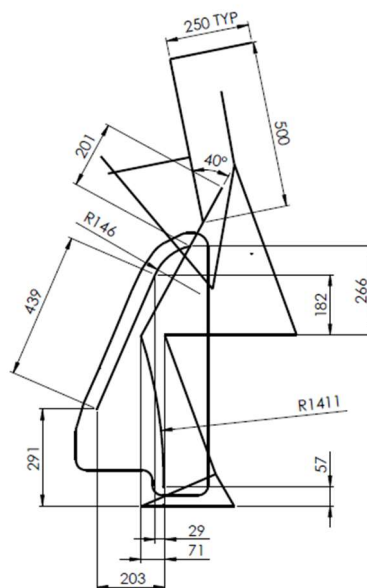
Geometry and Dimensions of Slider Plate Mechanism
